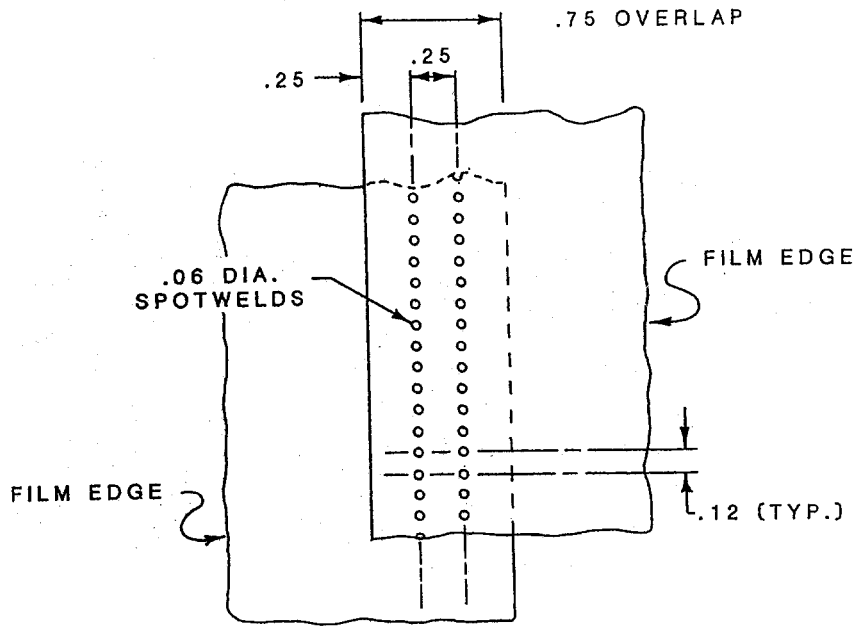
Detail of Membrane Weld Seam.
